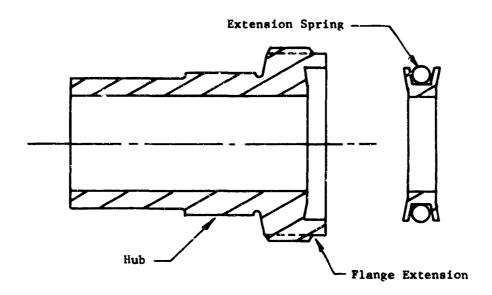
MODIFIED FLANGE AND SEAL WITH SPRING
